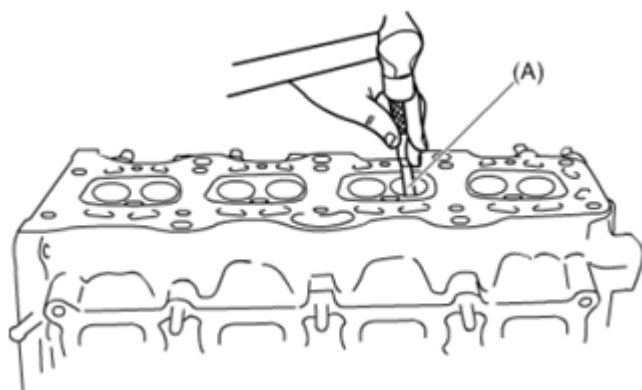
Removing Valve Stem Seal And Valve Spring Seat
